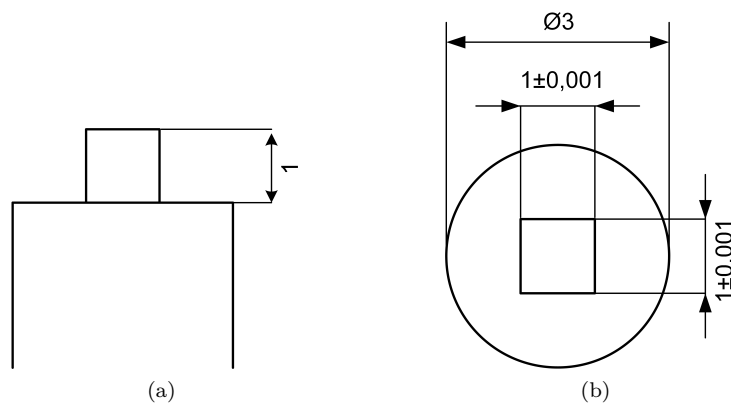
Technical drawing of EDM benchmark punch geometry. Figure (a) is a side view and (b) is the top view. Note the narrow tolerance of $\pm 1\mu\text{m}$
